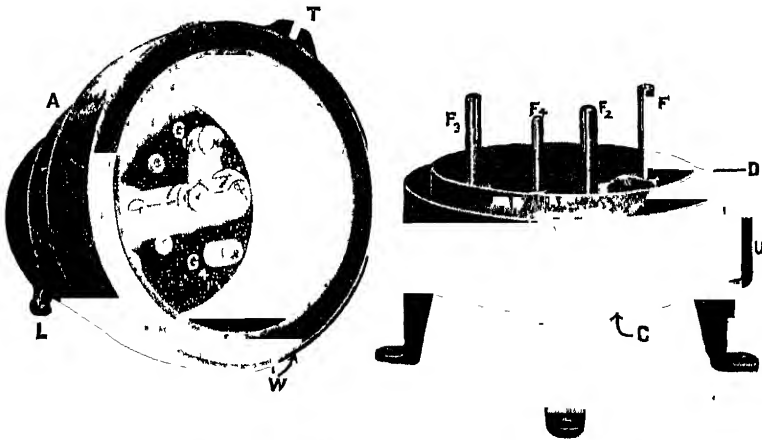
Westinghouse System—Details of Contact-Box, Switches removed
